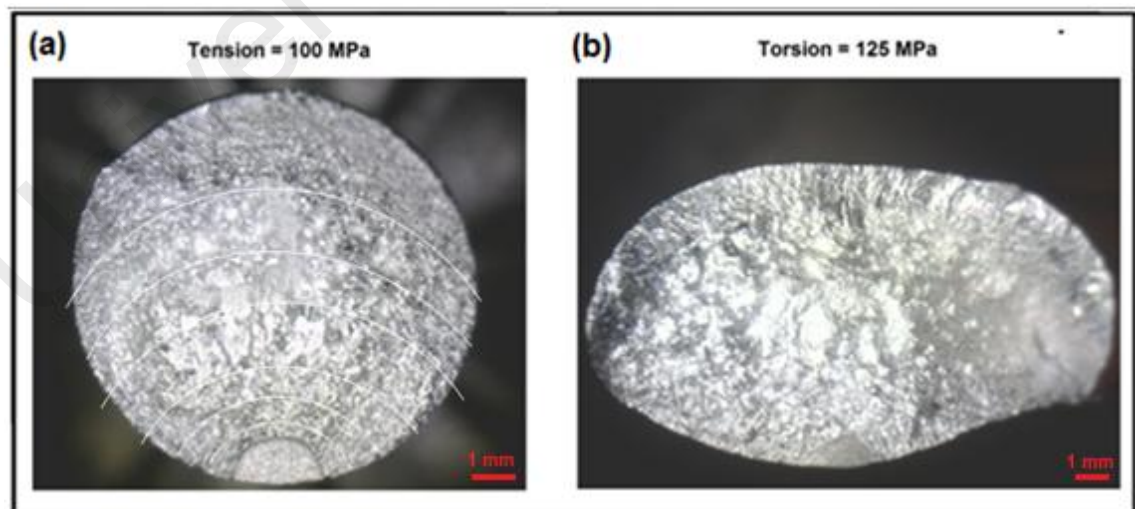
Fracture surface conditions of surface cracks ($a/c = 1$) (a) under tension load; (b) under torsion load.
